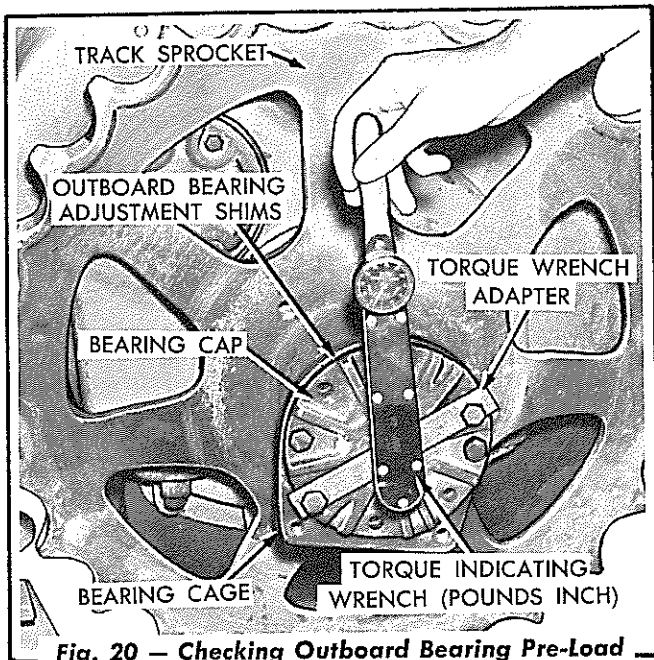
Checking Outboard Bearing Pre-Load Using Torque Wrench
